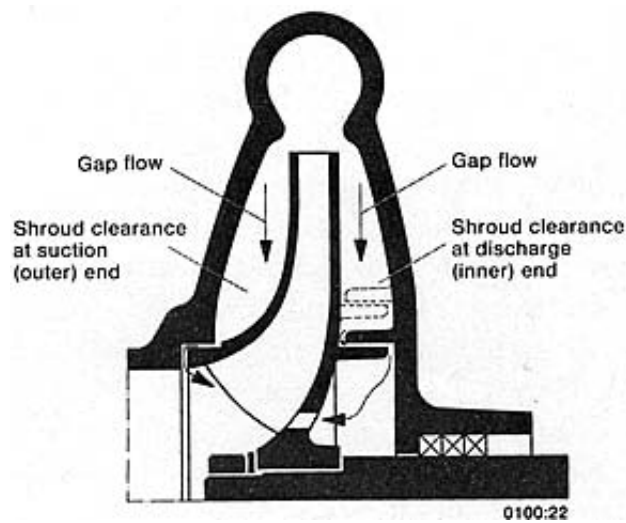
Axial force, single stage centrifugal pump with sealing gap at discharge end and balance holes
